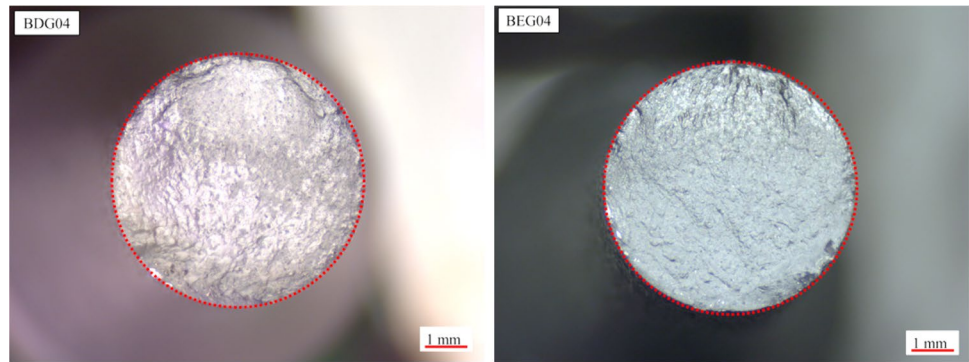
Stereoscopic images of fracture surfaces in slanted built and shot-peened samples
